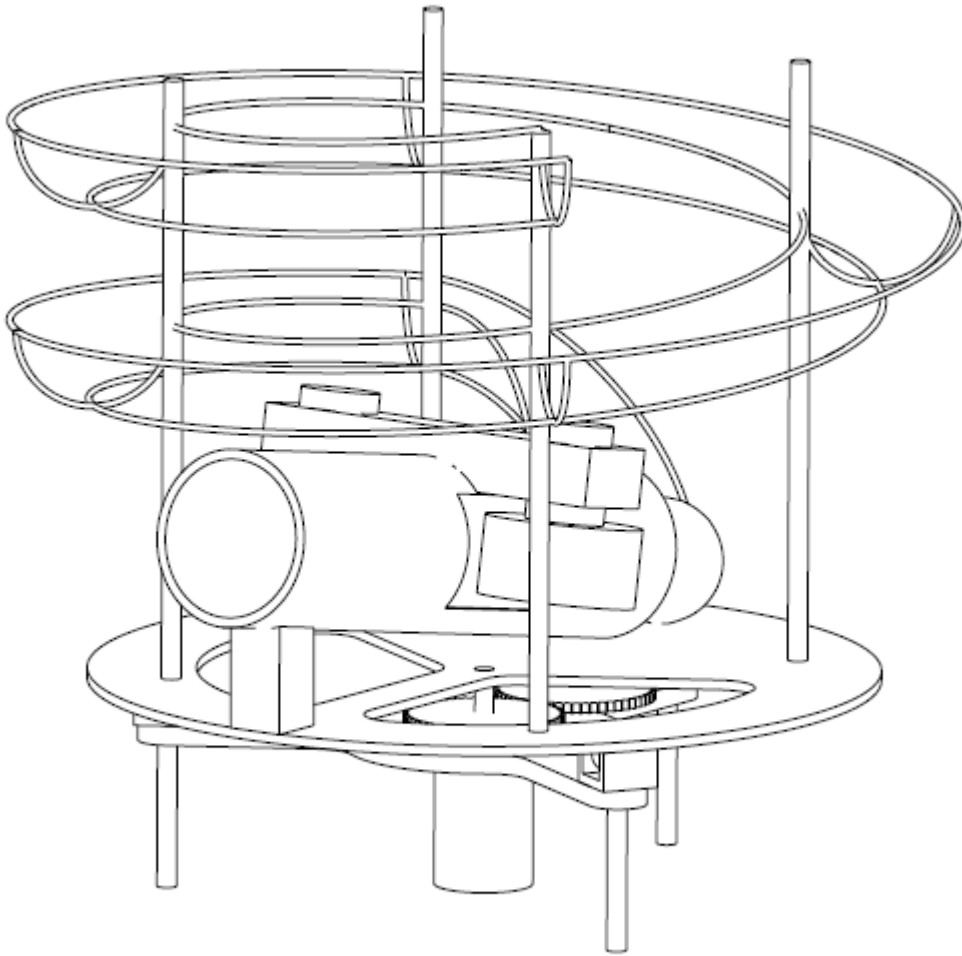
Assembly Drawing of Target Acquisition and Firing System
